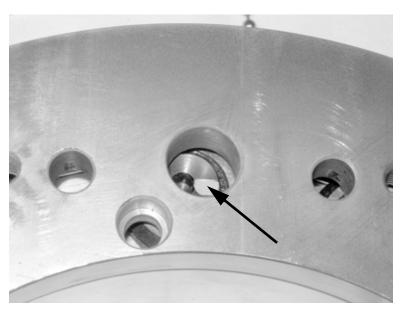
Use the marks on the bearing to see if the bearings are turning as you rotate the machine.
